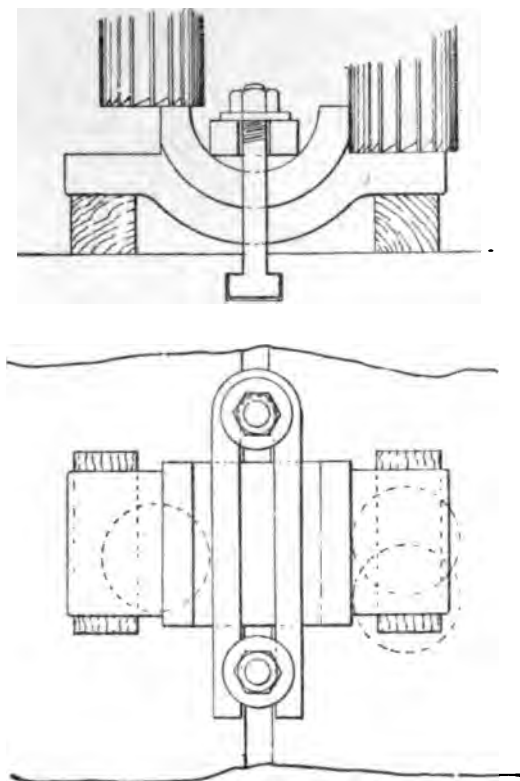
Cap held with Clip for milling Faces and Edges.
